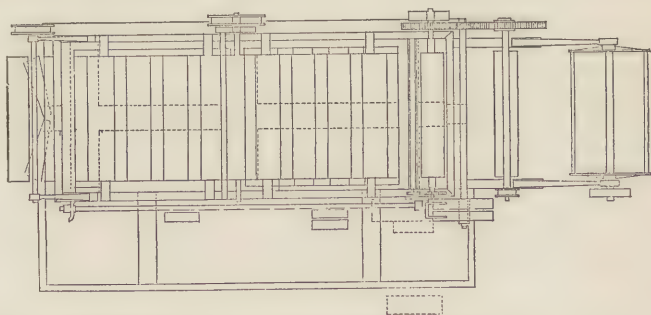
Continuous indigo-dyeing machine (E. Welter & Co.)—(plan).
